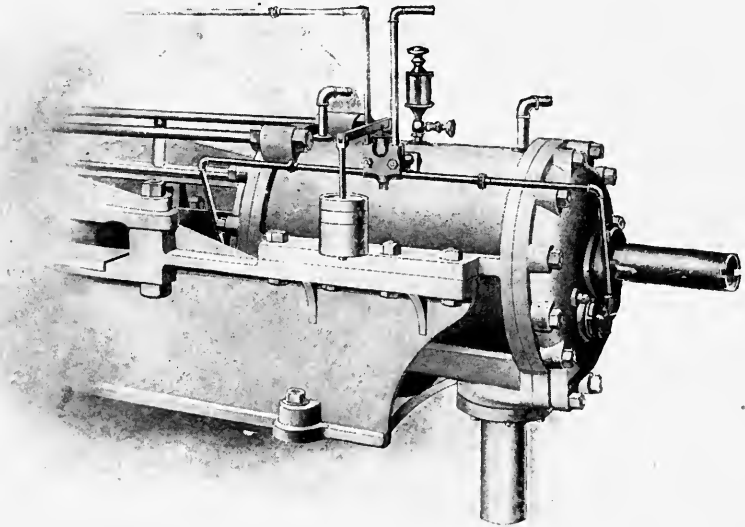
Air End of Ingersoll-Sergeant Piston Inlet Cold Air Compressor, showing Automatic Air Regulator and Unloading Device.
